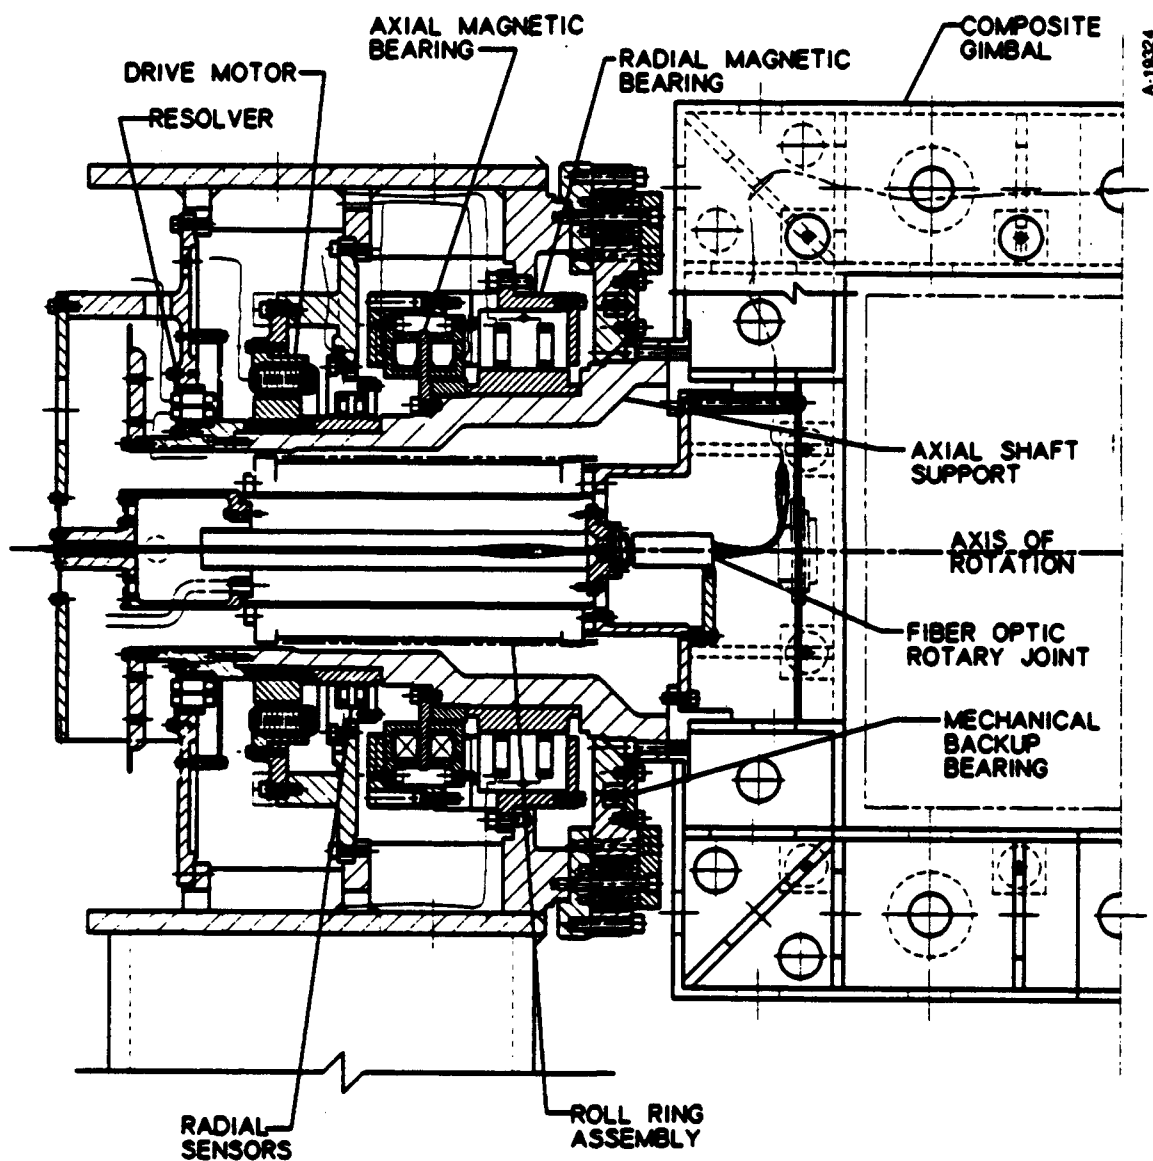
Single Axis Test Table Drive Side Assembly Drawing
